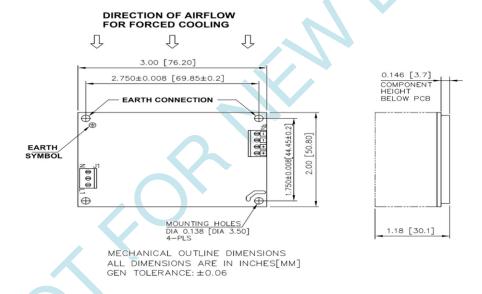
Mechanical Drawing - Screw Terminal (Option 1)
